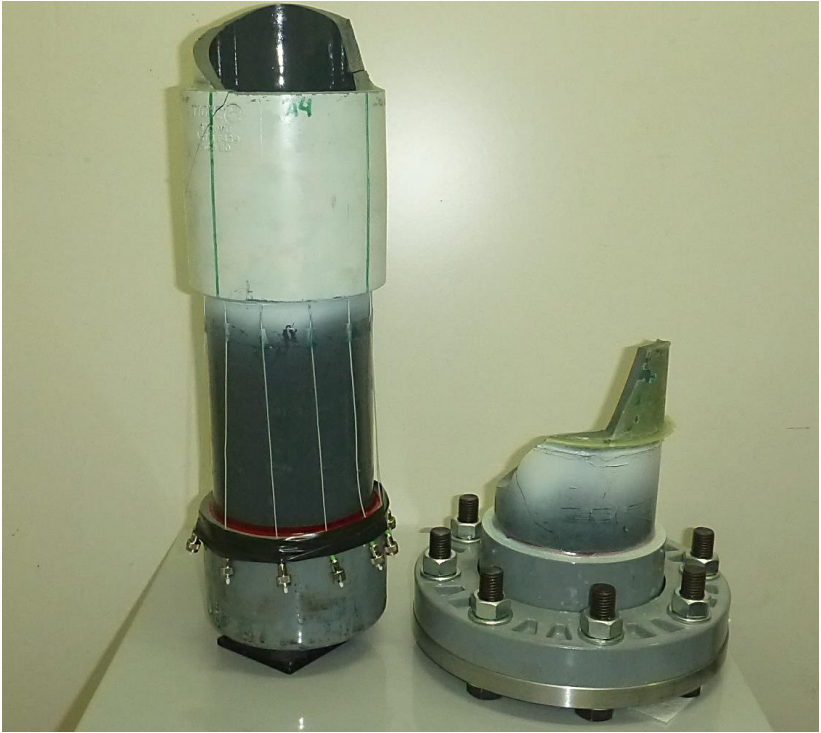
Destructive test aftermath. Test specimen B failed in the adhesive bonded joint without embedded fiber optic sensors.
